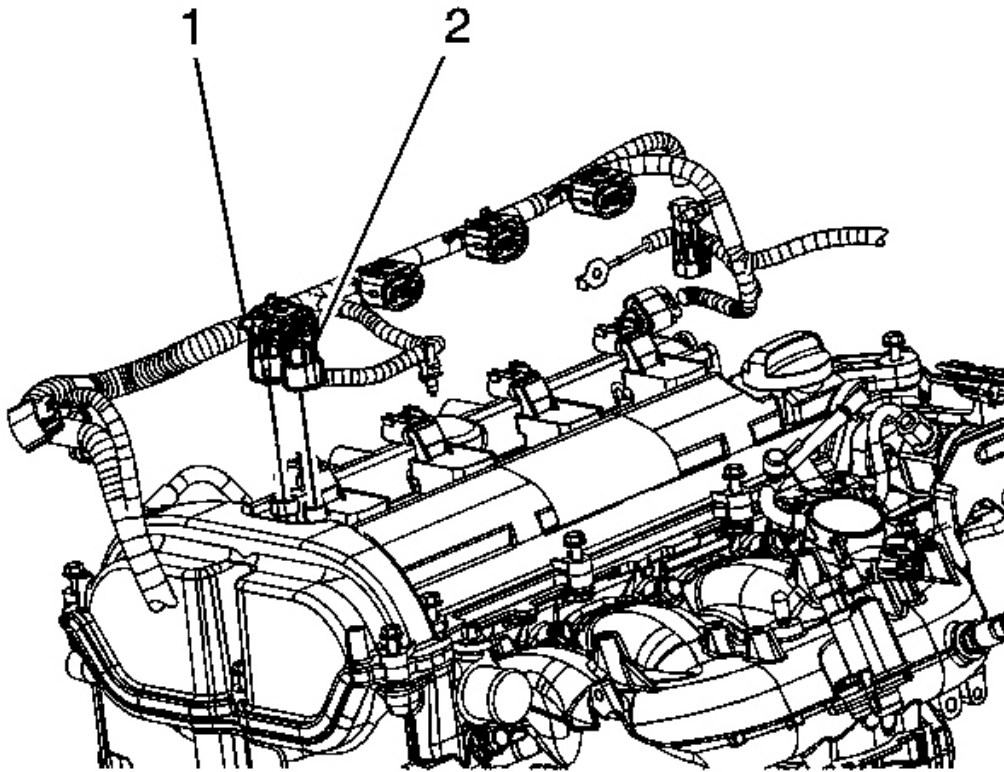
View Of Intake & Exhaust Camshaft Position Actuator Solenoid Valve
